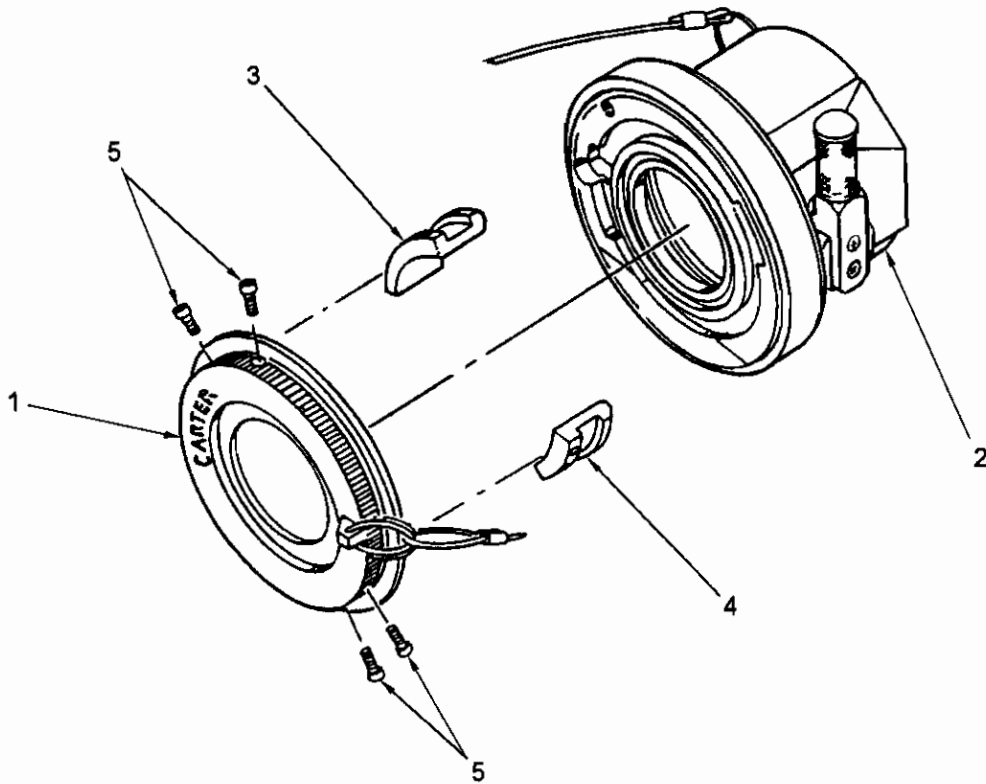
Three-Inch Unisex Coupling Dust Cap Lug Replacement
